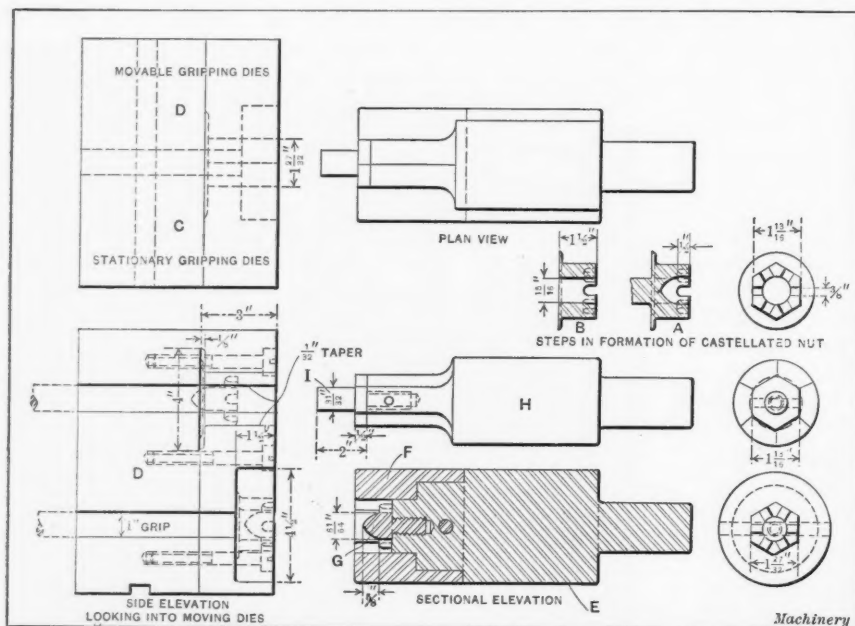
Details of the Dies and Tools used for making the Castellated Nut shown in Fig. 49
